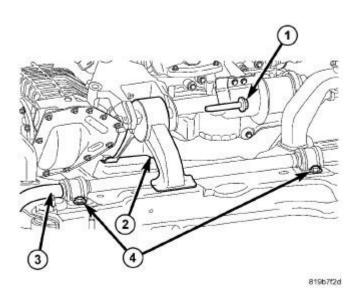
Rear Engine Mount & Transaxle Bracket Courtesy of CHRYSLER LLC
